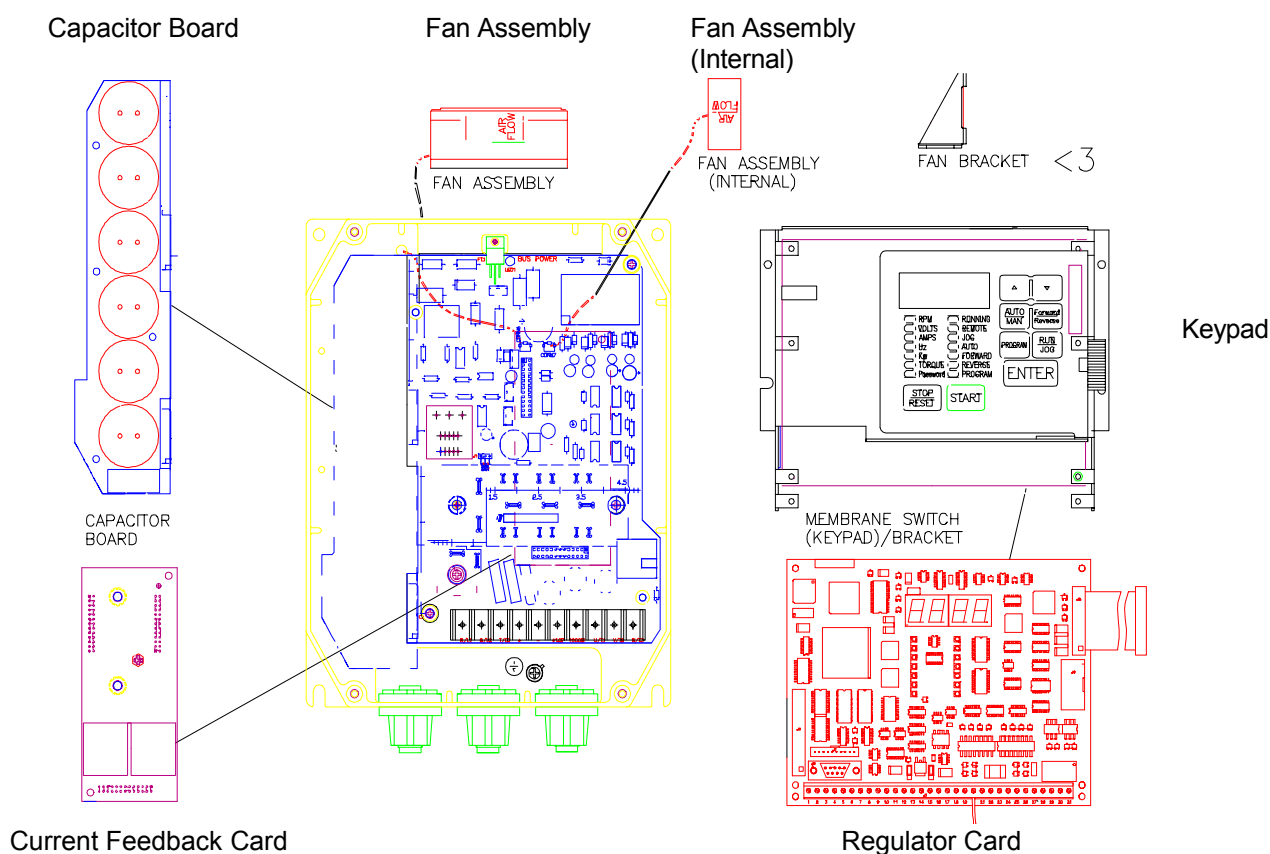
Replacement parts locations for NEMA Design Inverters Type GV3000U-AC002 to 015
